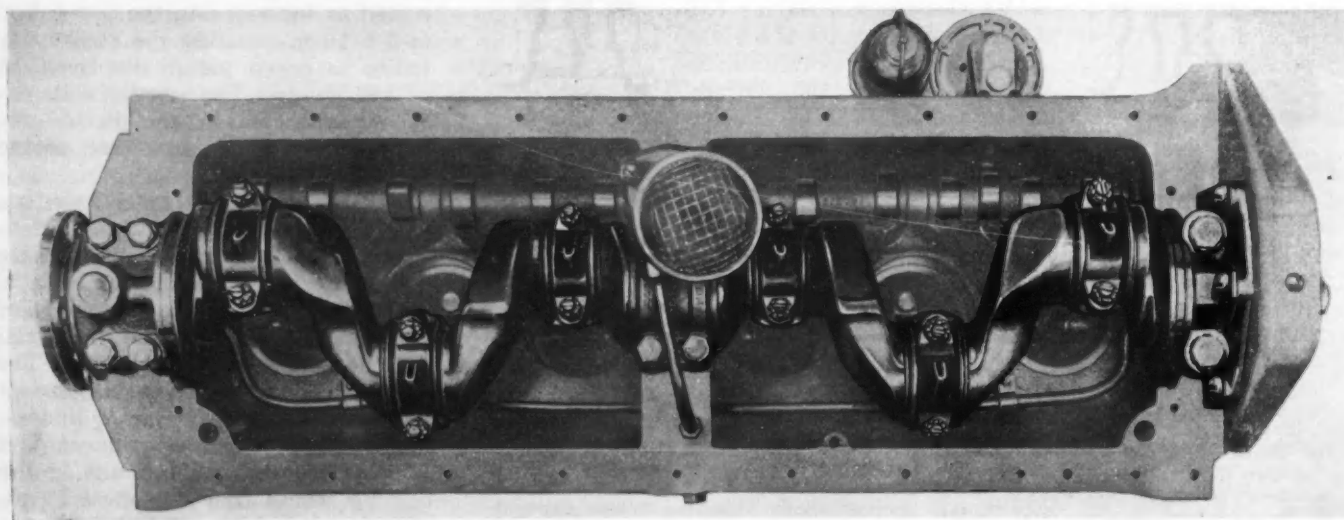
CRANKSHAFT IN PLACE IN CHEVROLET ENGINE
